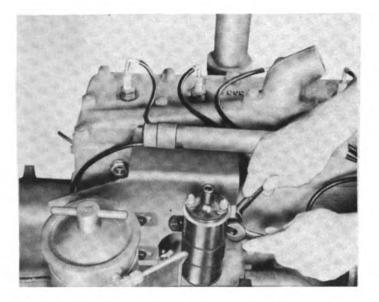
Installing Oil Filter Coil and Bracket Assembly.
